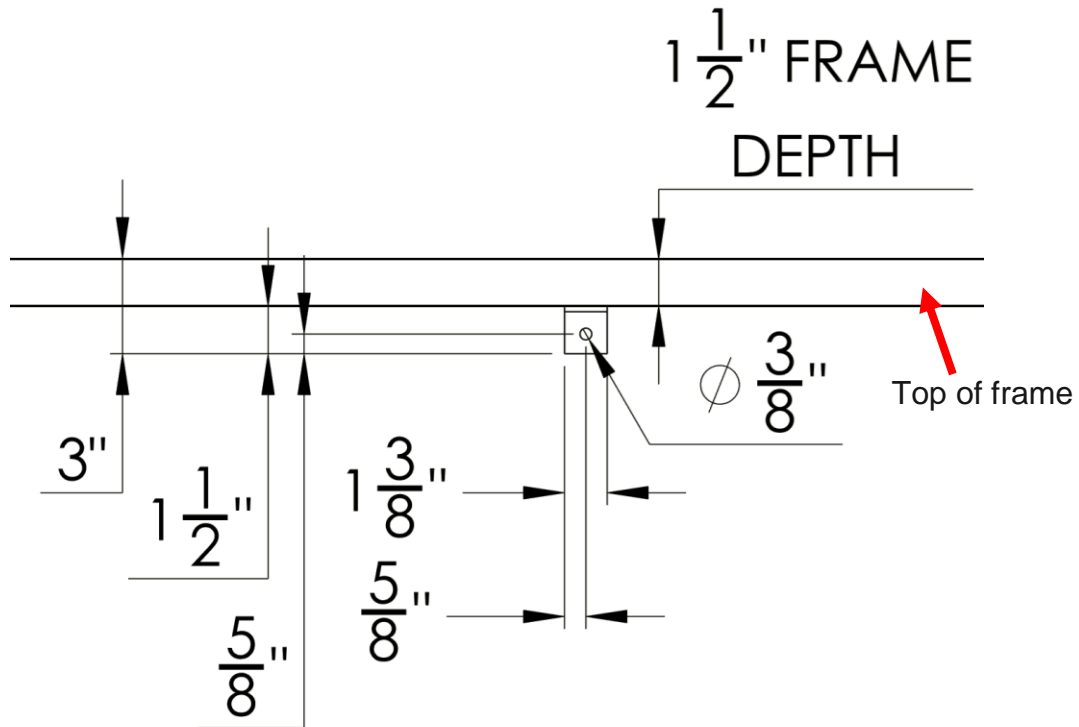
Top view drawing detail showing critical dimensions of aperture mount bracket.
